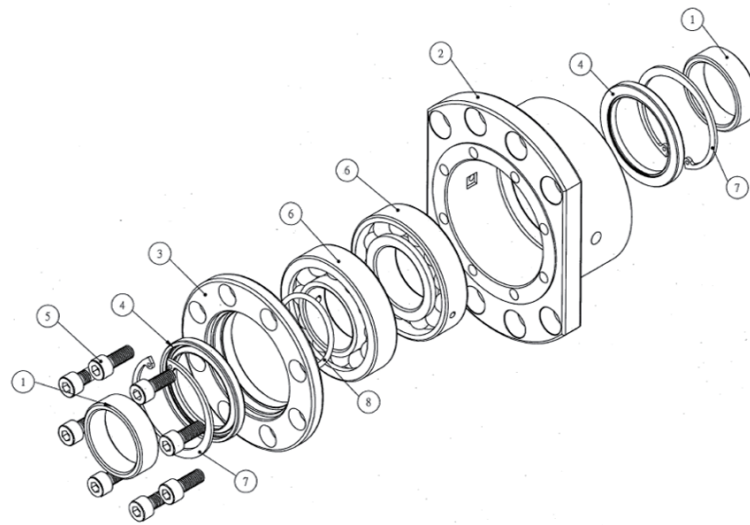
Exploded drawing of the proposed bearing mount assembly. 1: spindle adapter, 2: mounting body, 3: bearing pressing cap, 4: oil seals, 5: fastening bolts, 6: angular ball bearings, 7: snap ring, and 8: spacer ring.
